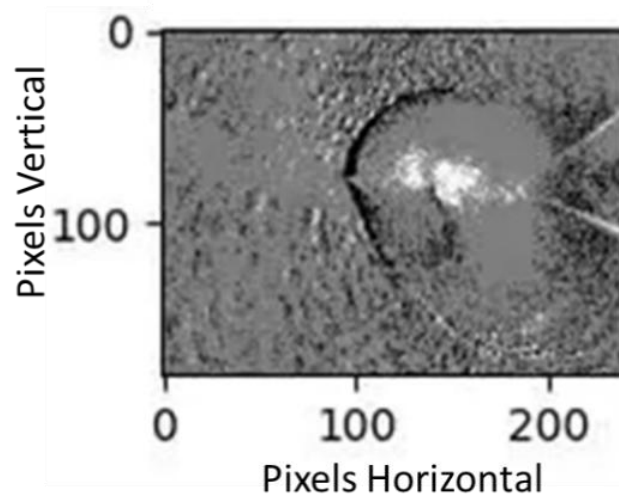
Example of a gas tungsten arc welder (GTAW) melt pool observed using a Davis240 neuromorphic imager with welding shade.
